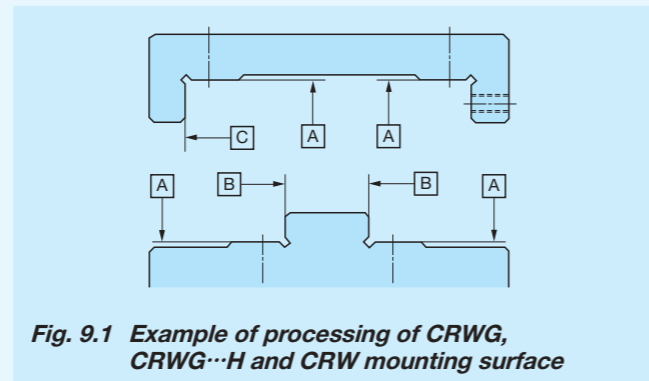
Example of processing of CRWG, CRWG...H and CRW mounting surface
